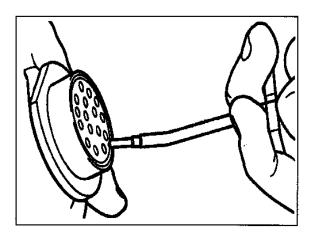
Pull Contact/Wire/Tool Assembly Out of Connector
